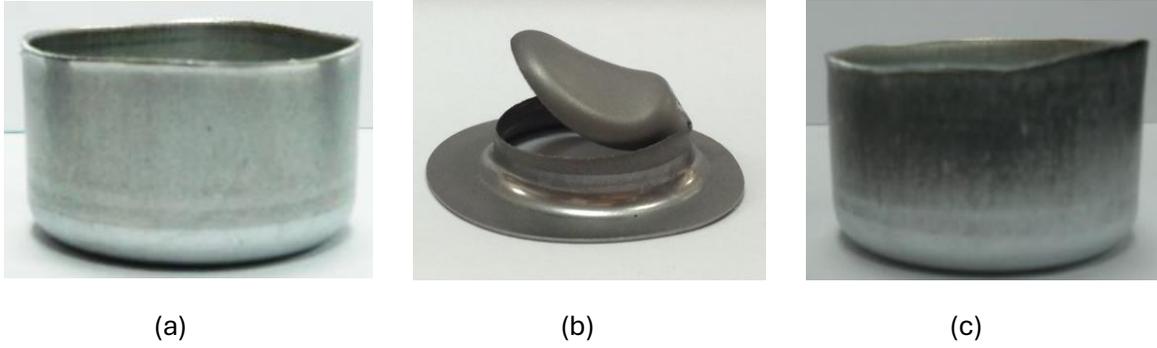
Deep drawing test results for GI with different passivation products; (a) XSL-100 (zinc coating retains its original appearance), (b) XCF-100 (cracked) and (c) XAF-100 (zinc coating severely damaged/blackened)
